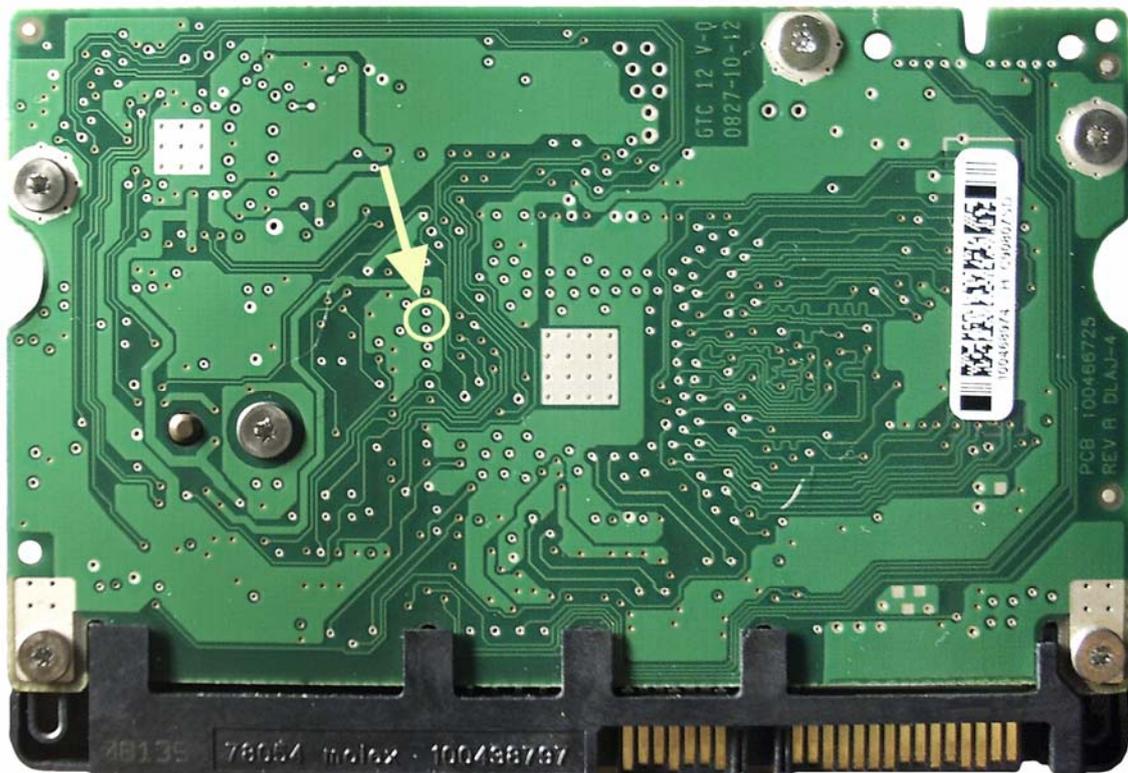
Board view from the external side. Connection points are marked in yellow.
